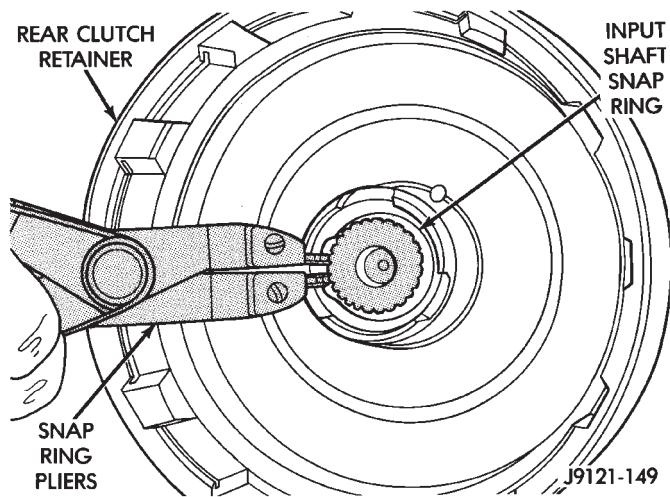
Removing/Installing Input Shaft Snap-Ring
